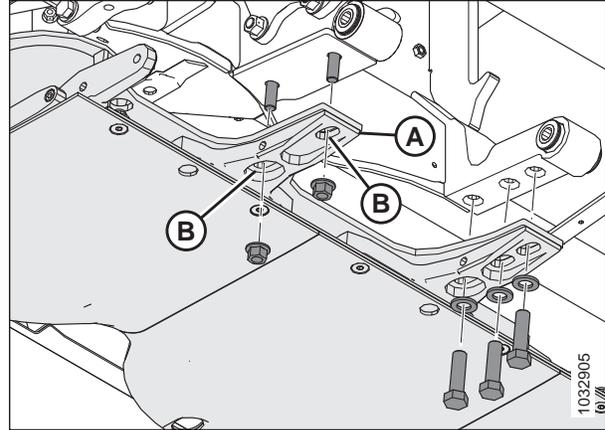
Cutterbar – Bottom View, Left End Shown, Outboard Support
